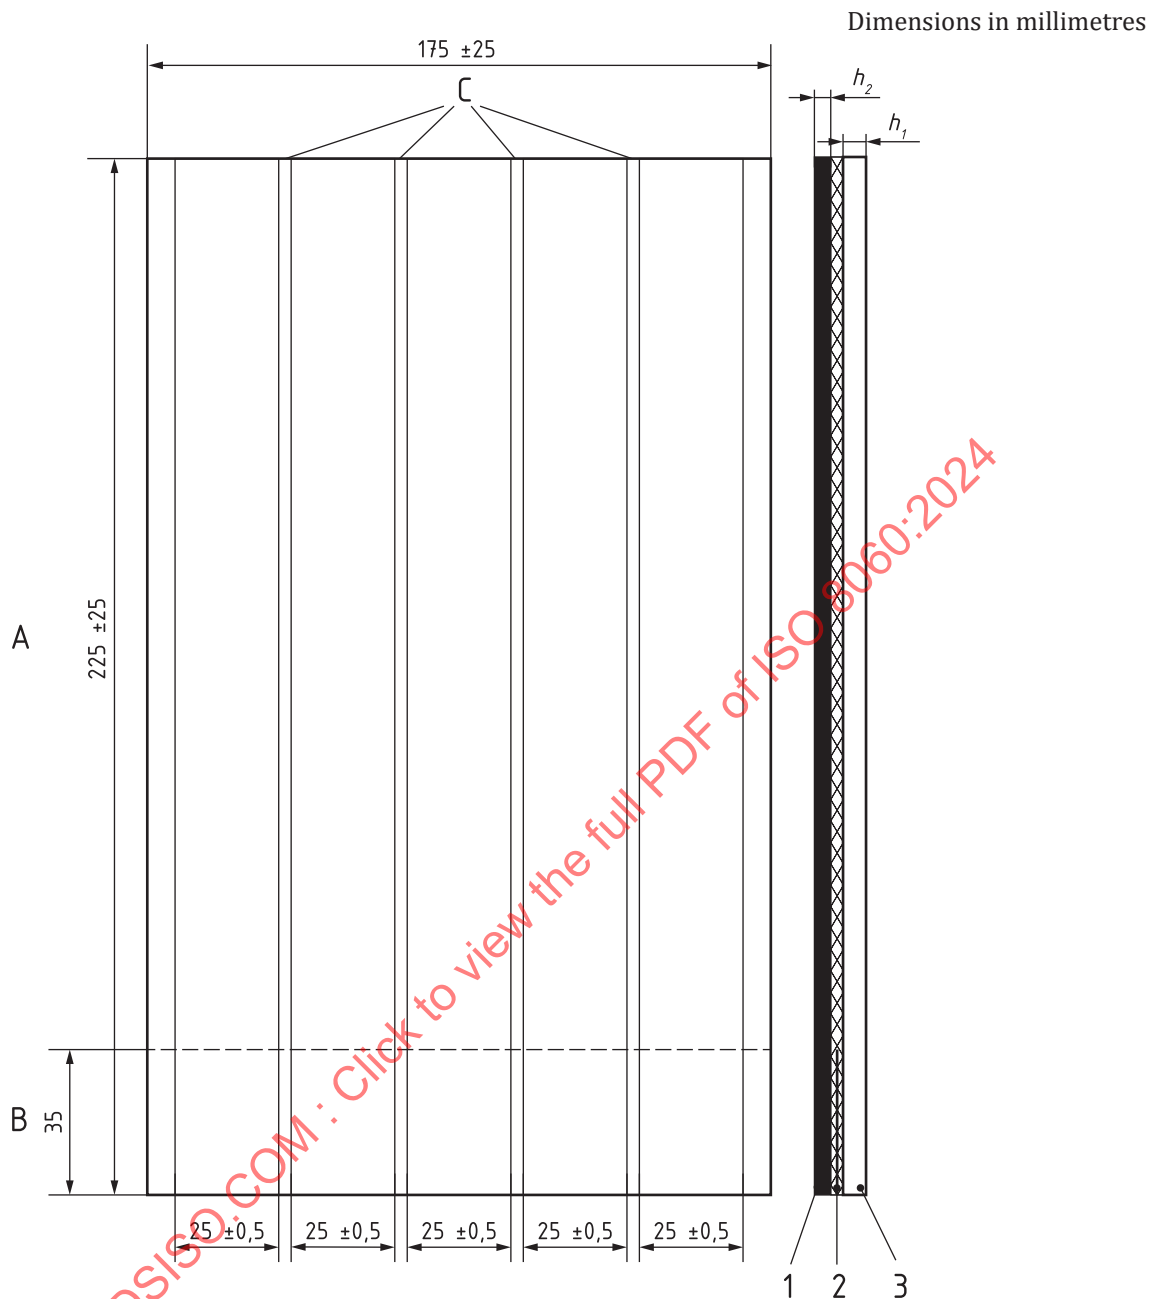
Suggested bonded CFRP/metal plate from which specimens are cut
